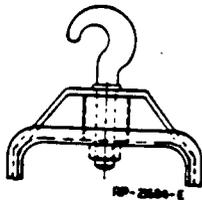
OPTIONAL SWIVEL HOOK FOR USE WITH R-4145 DETAILS 3 OR 4 (PAR. 3.312)
